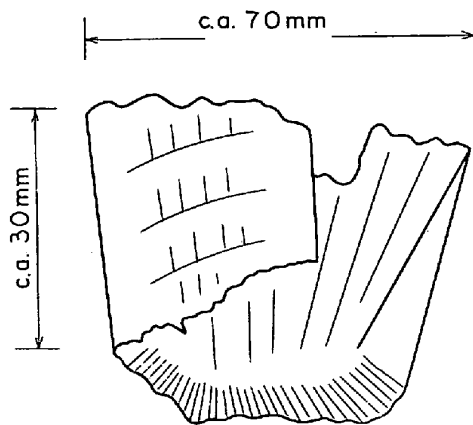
Appearance of stainless steel chip from Kieseling machine.
